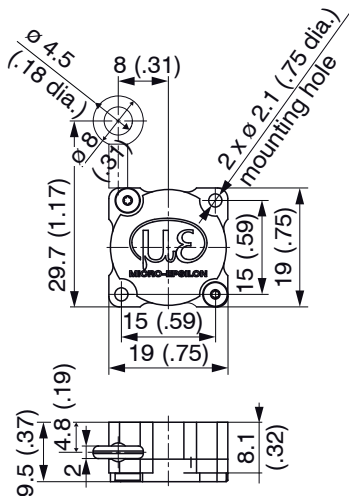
Dimensional drawing WDS-40-MT19-P, dimensions in mm, not to scale
